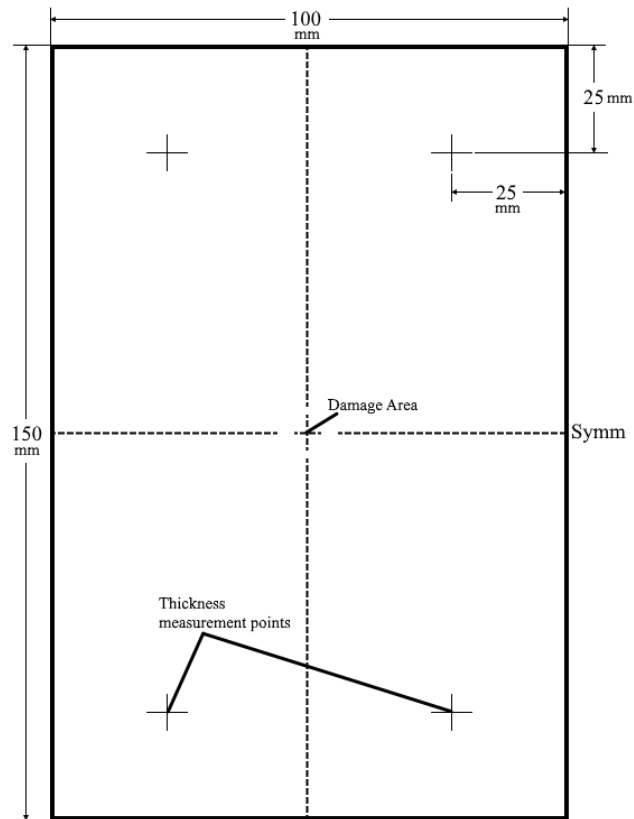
Dimensions and measurement points of CFRP plate.
